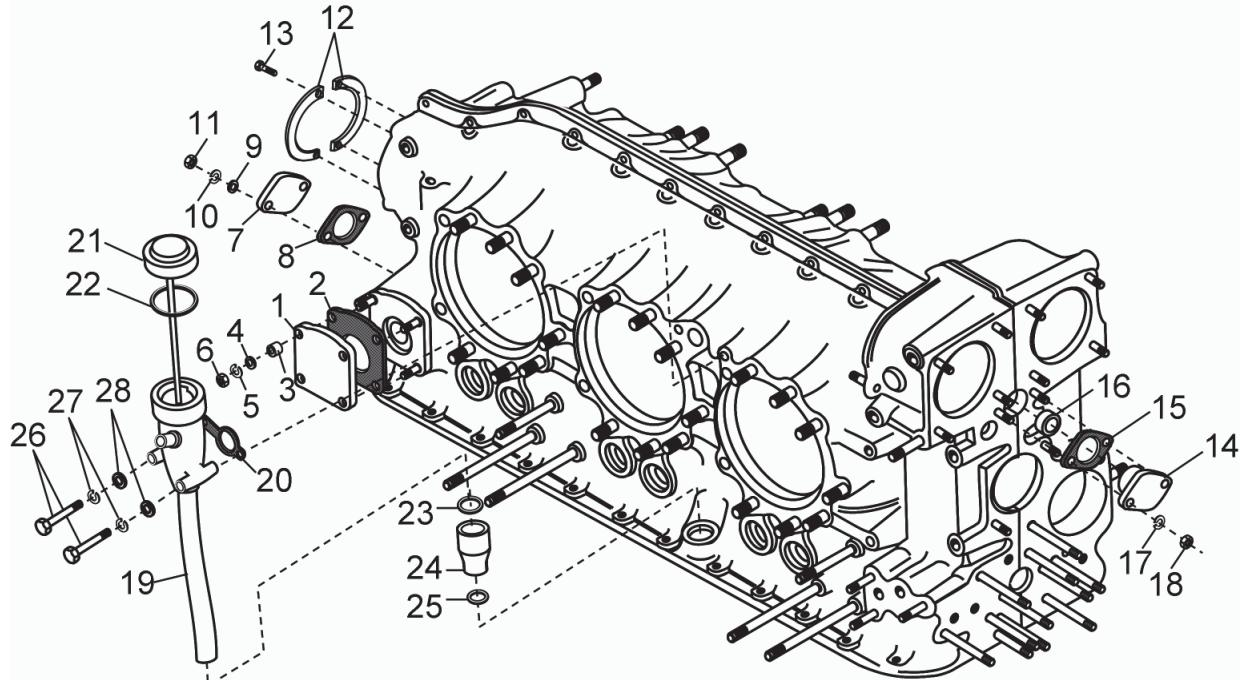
Oil Filler, Support Pin, and Camshaft Cover
